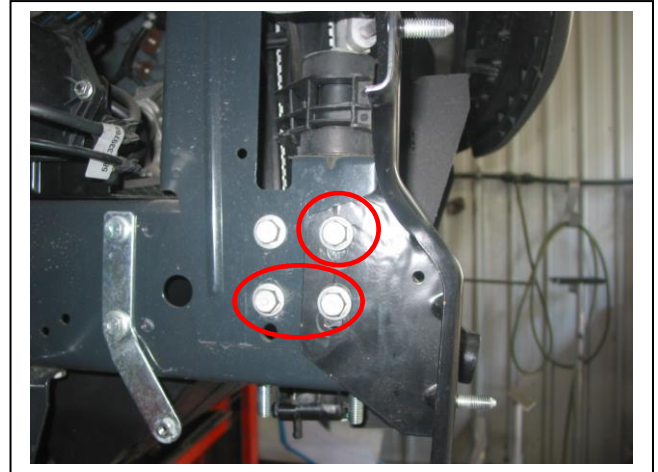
Remove three 16mm head bolts from front of chassis rail.
